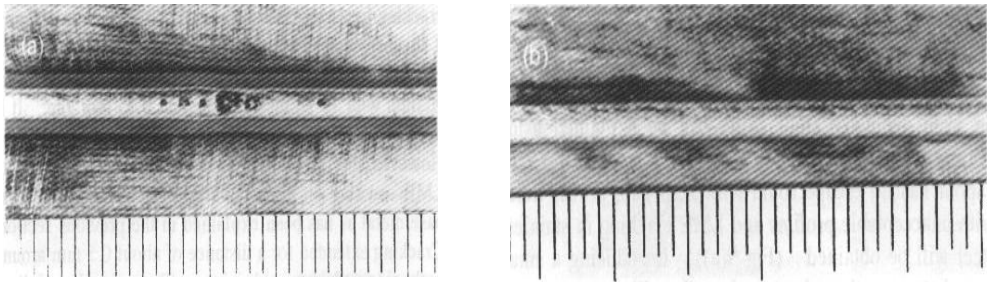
Photographs of laser welds produced using 15 l/min helium shielding and zero gap between the sheets after zinc removal from (a) one side and (b) two sides of the weld area of Zn-coated sheet.
